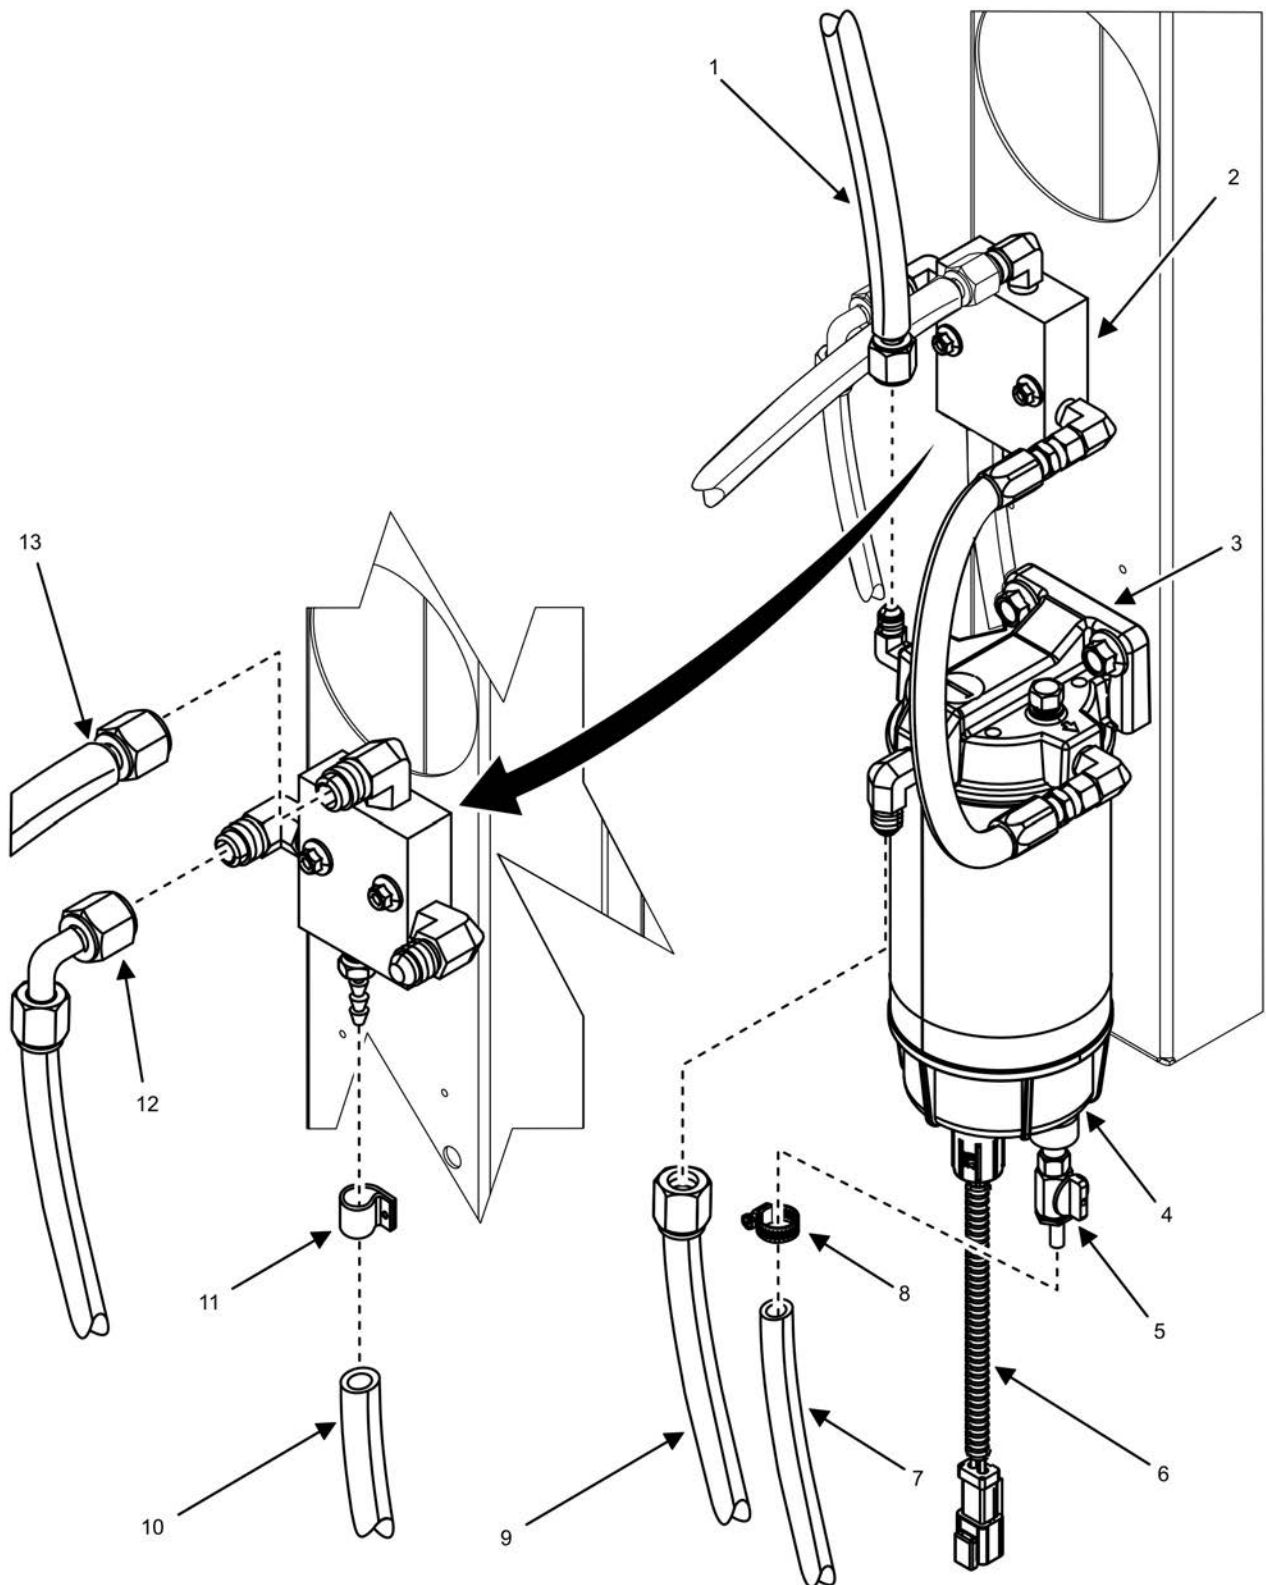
Fuel Filter/Water Separator Assembly — Detail.
